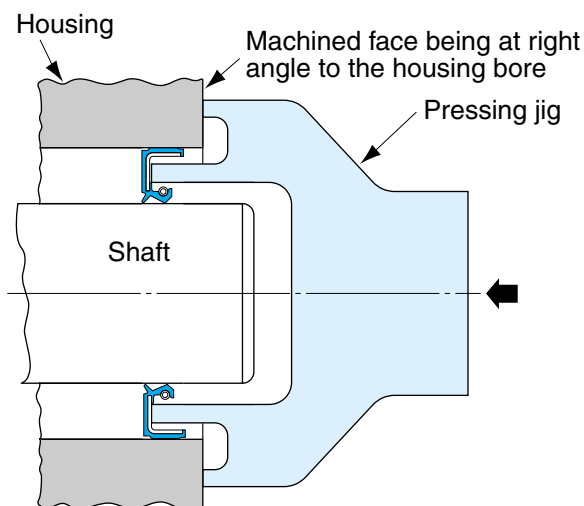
Seal press-fitting jig for straight housing bore
